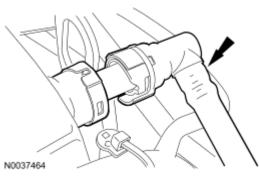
Locating Crankcase Vent Tube Courtesy of FORD MOTOR CO.
